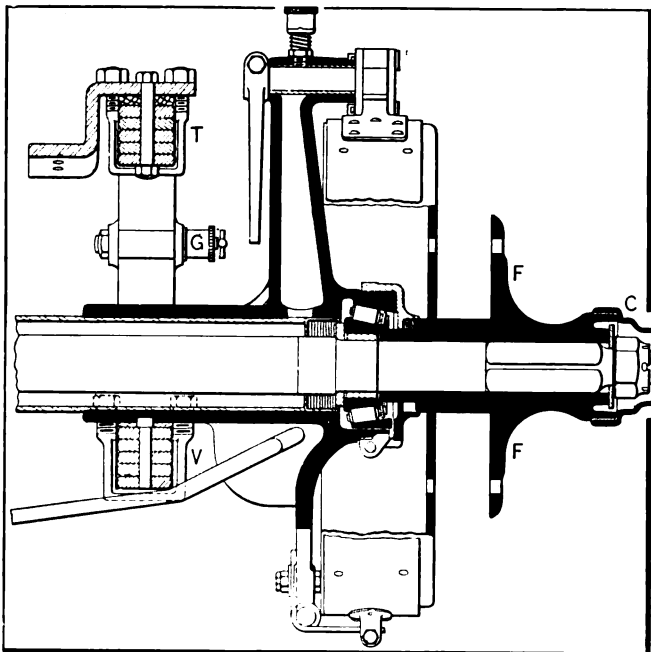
Section through wheel hub and axle showing brake and spring supports
